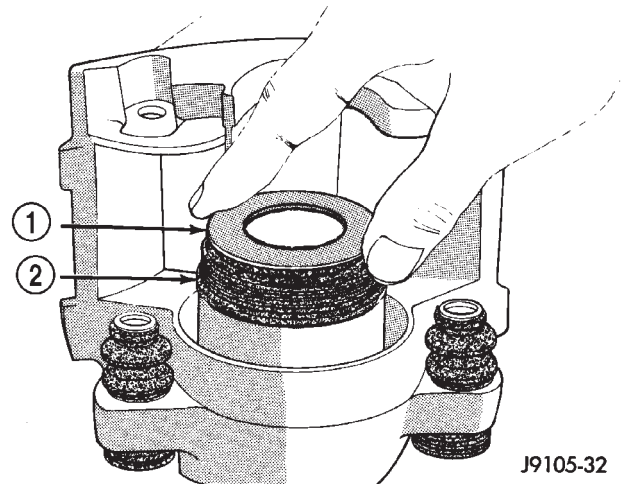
CALIPER PISTON INSTALLATION - TYPICAL
